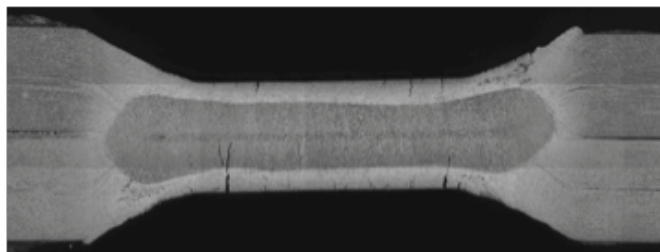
Cross-section view of a weld with expulsion, cracking and surface indentation.
